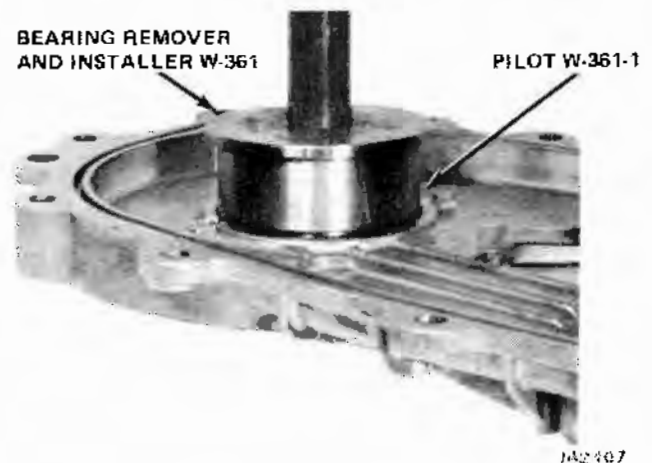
Removing Drive Sprocket Rear Needle Bearing
